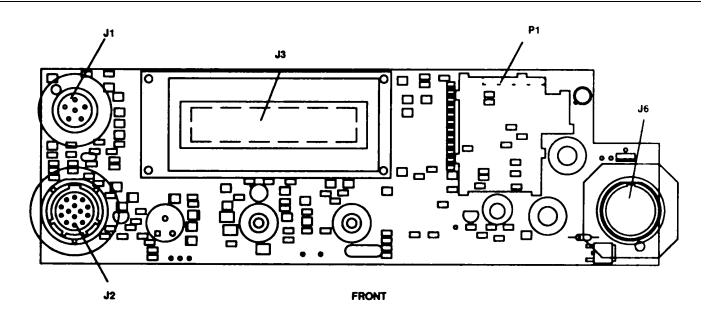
A9A1 Coupler Input PWB Assembly Component Location Diagram (10303-2150 Rev. D)
